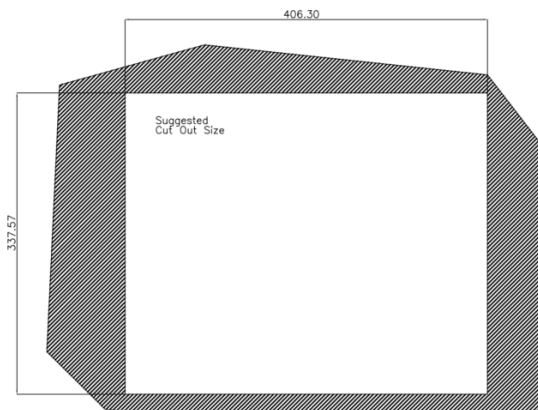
DM2-190H(L) Cutout Dimensions (Unit: mm)
